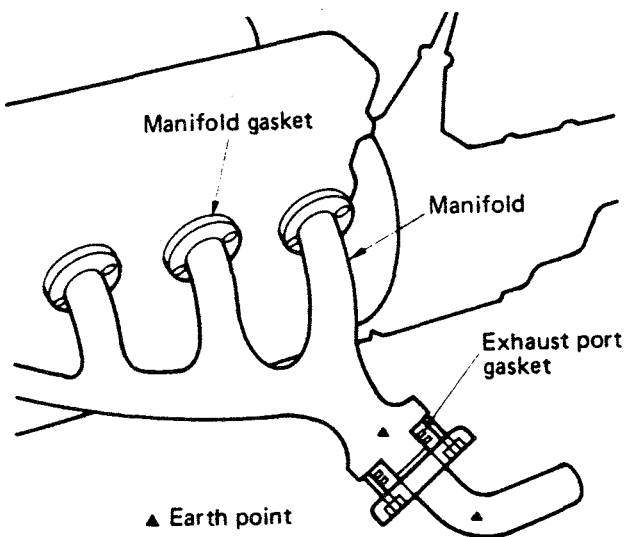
Bond Manifold and Exhaust Port to Engine Block
